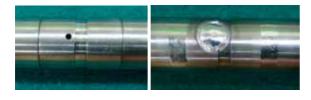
Cladding and middle plug weld and pinhole weld (left: before weld, right: after weld)
